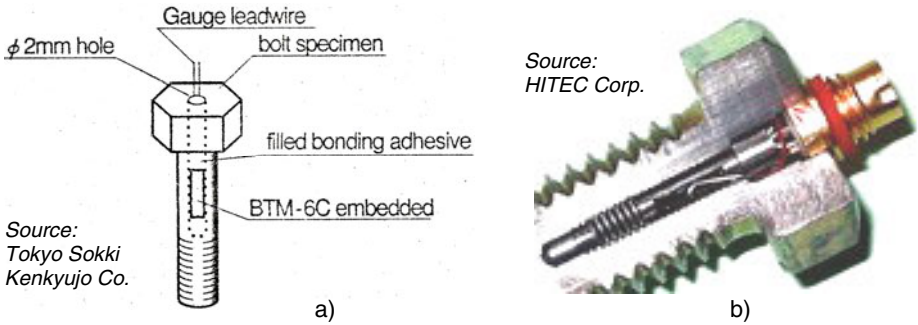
Strain gauged bolts for measuring tensile forces in technological assemblings
